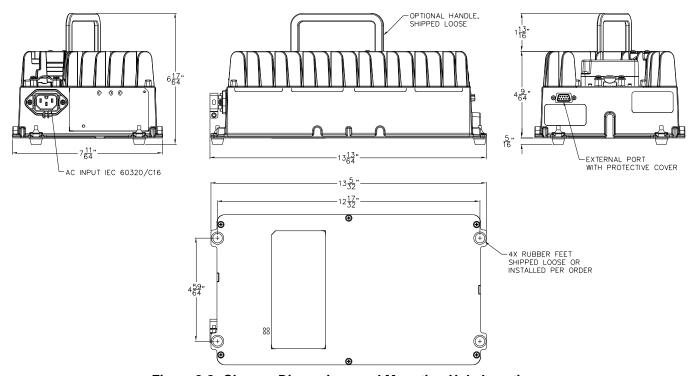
Charger Dimensions and Mounting Hole Locations
